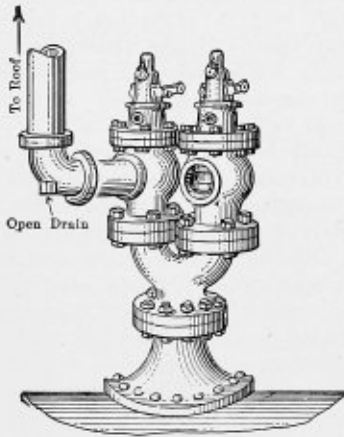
Twin Safety Valves Mounted On Common "Y" Base
